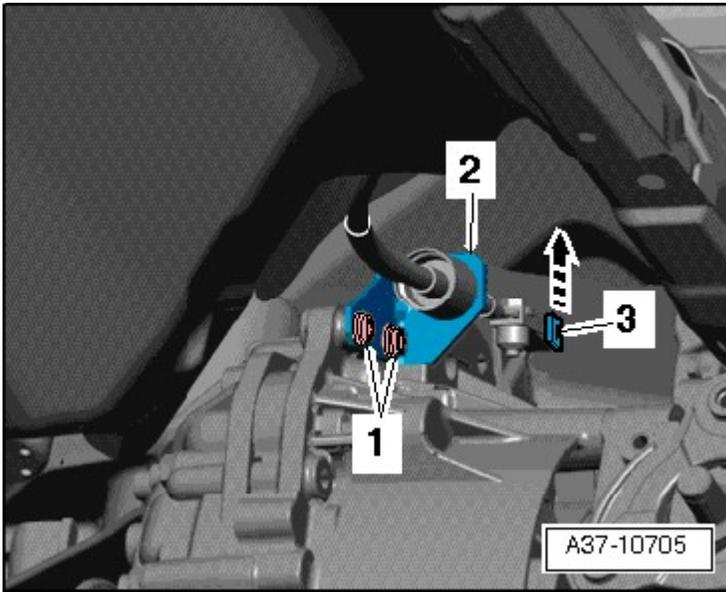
Identifying Elector Lever Cable Bracket Bolts And Locking Washer
